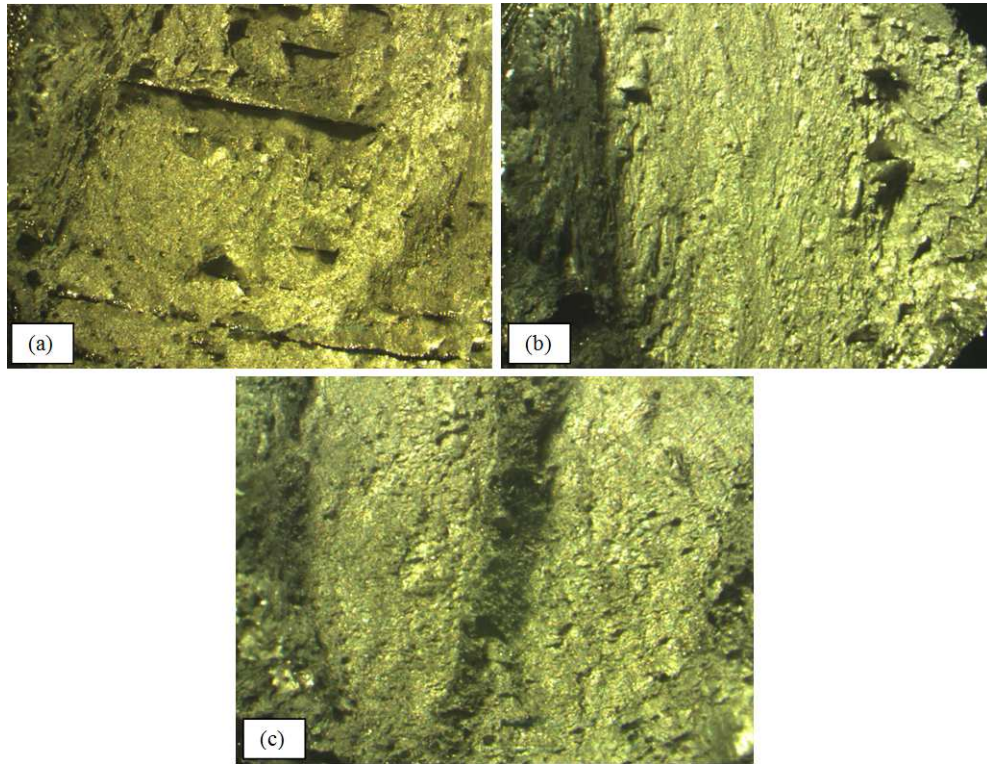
Fracture surfaces of specimens (a) X2, (b) Y2 and (c) Z2
